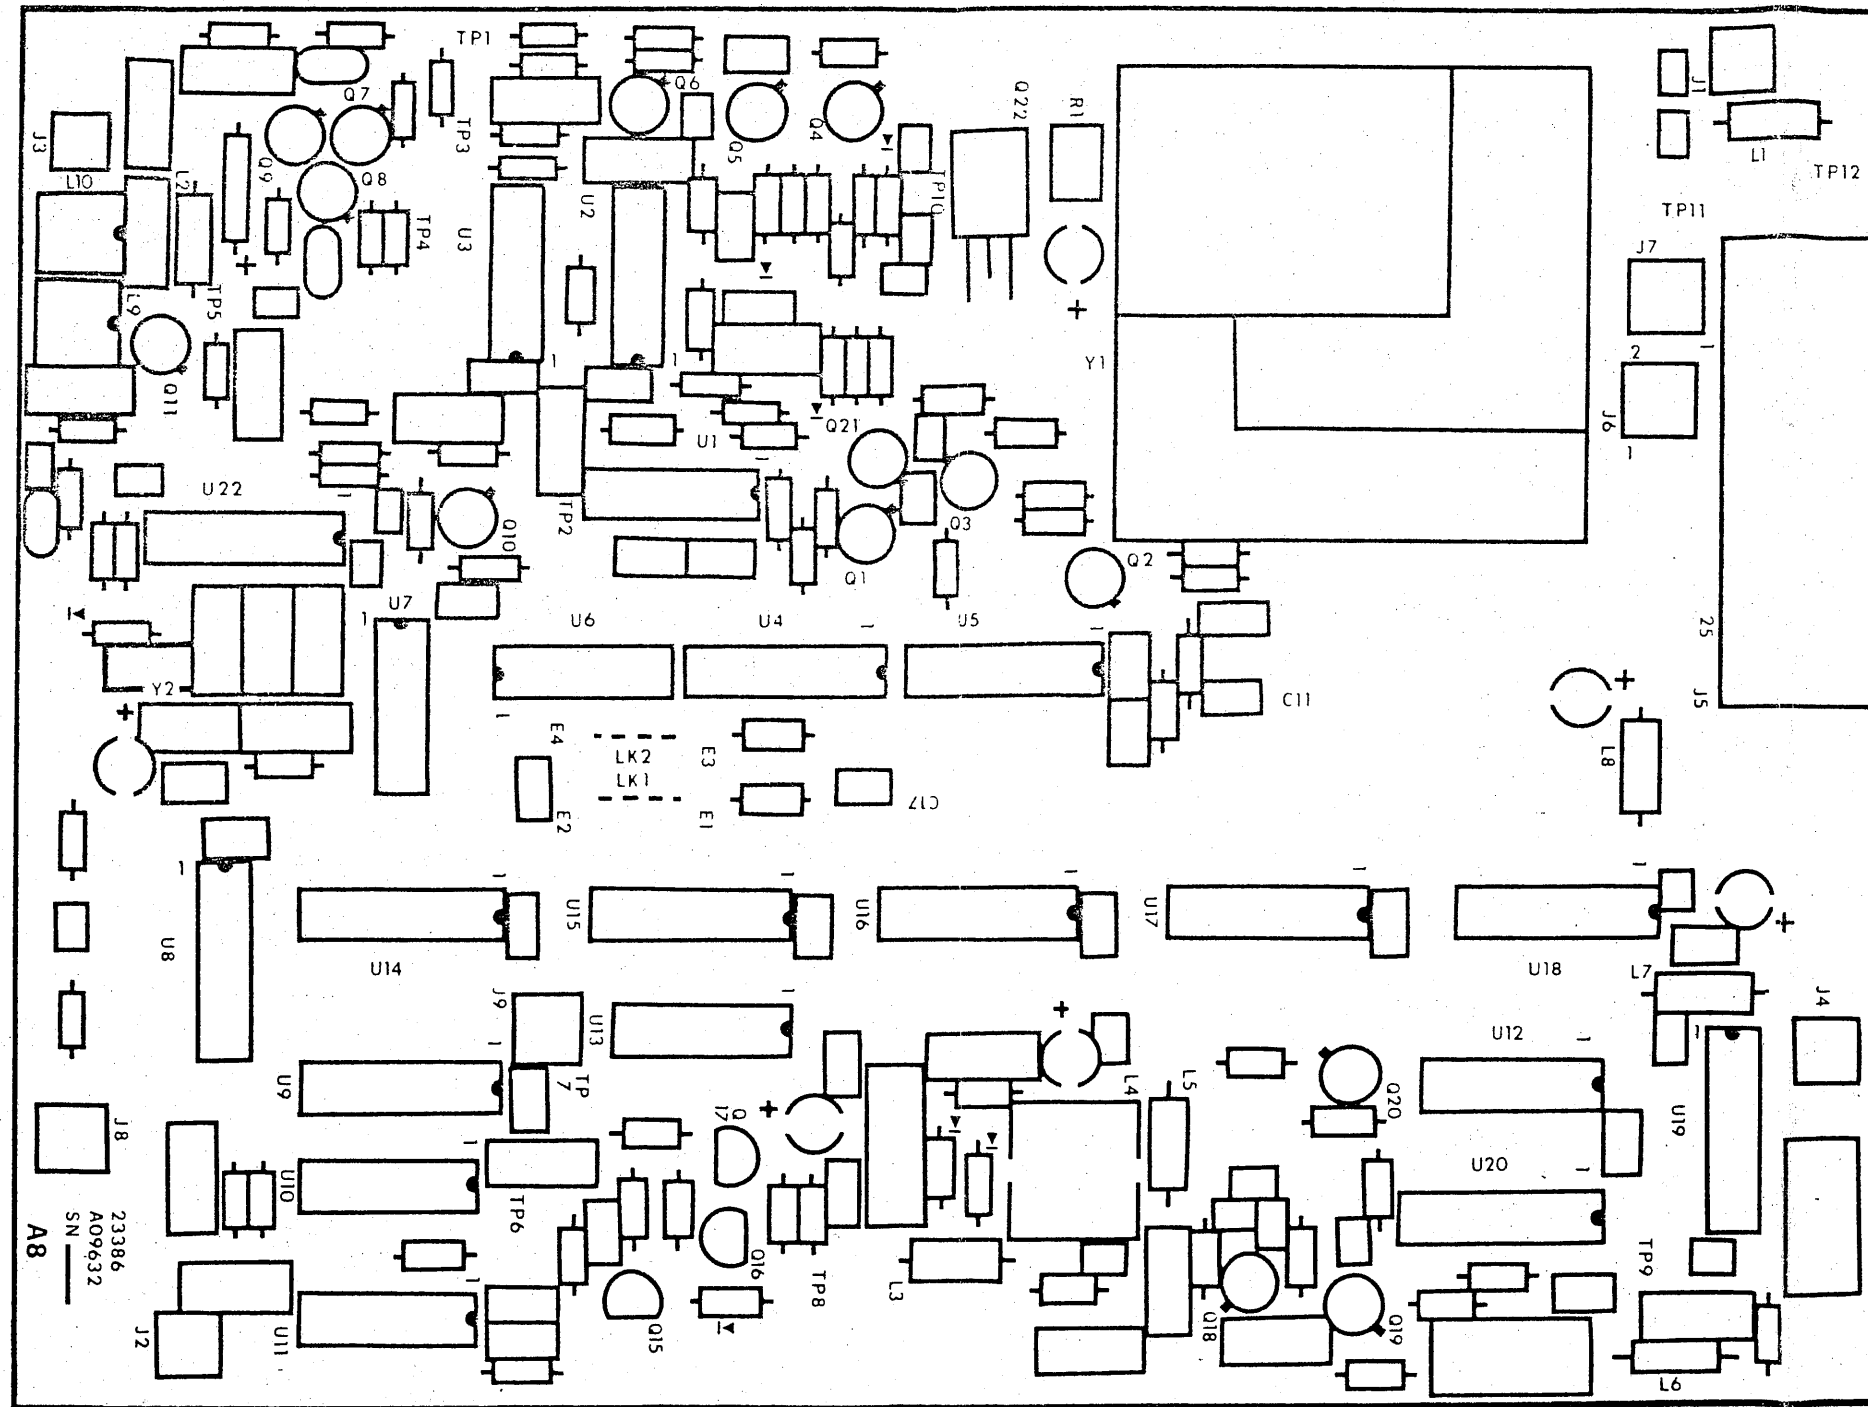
2nd LO/BFO Synthesizer Circuit Card Assembly (A8) Component Location Diagram
